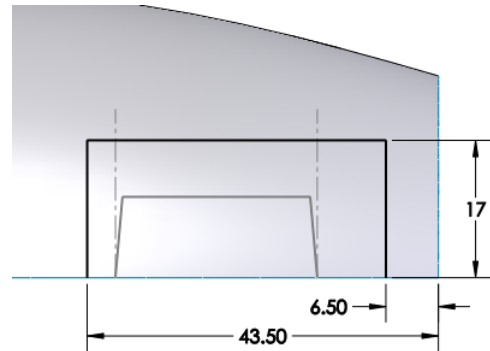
Sketch of the second section for creating the lofted surface of the handle
